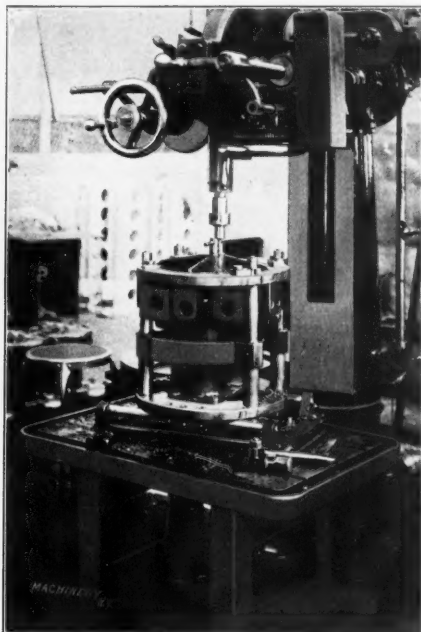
Jig for Holding Cylinders while Drilling, Reaming or Tapping the Various Holes
